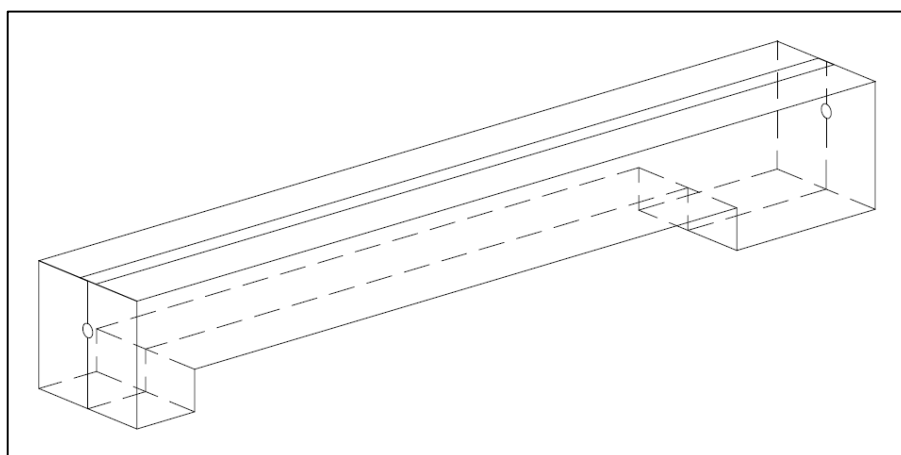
Solvent trap drawing in three-dimensional view done with AutoCAD.
